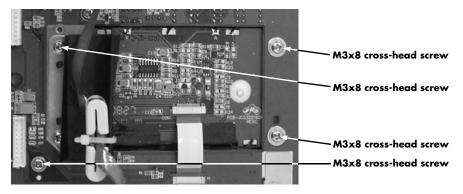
Remove four (4) M3x8 cross-head screws.
